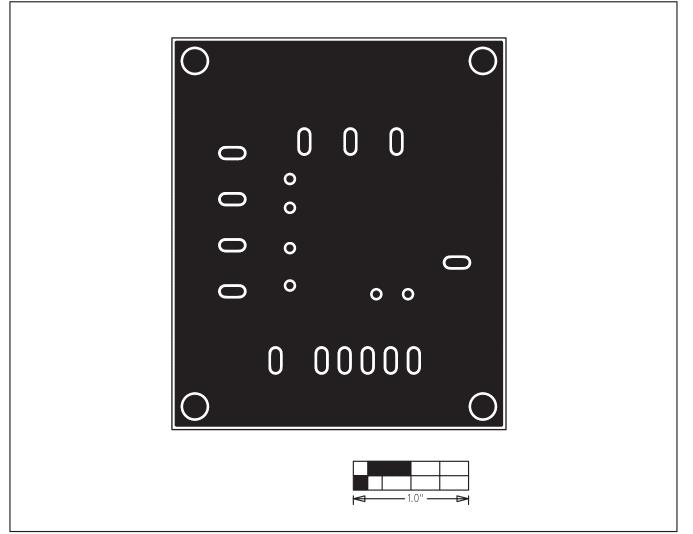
MAX17109 EV Kit PCB Layout—Solder Side
